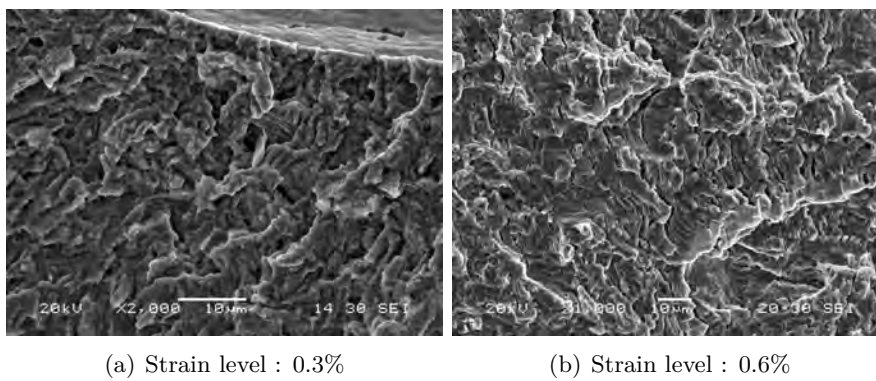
Fracture surfaces at the scale 10 µm
